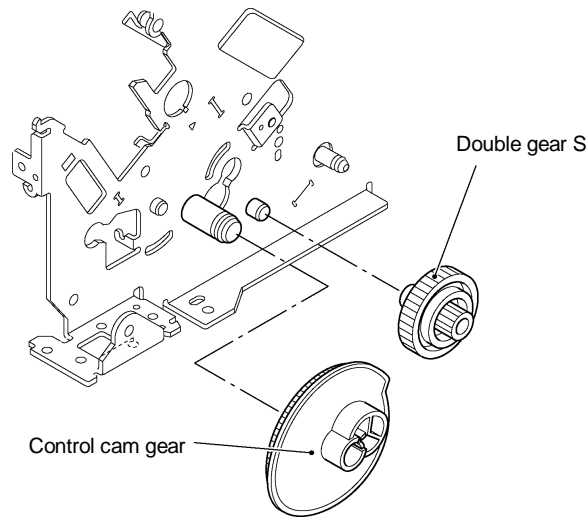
Removing the Right Side of the Chassis 2
